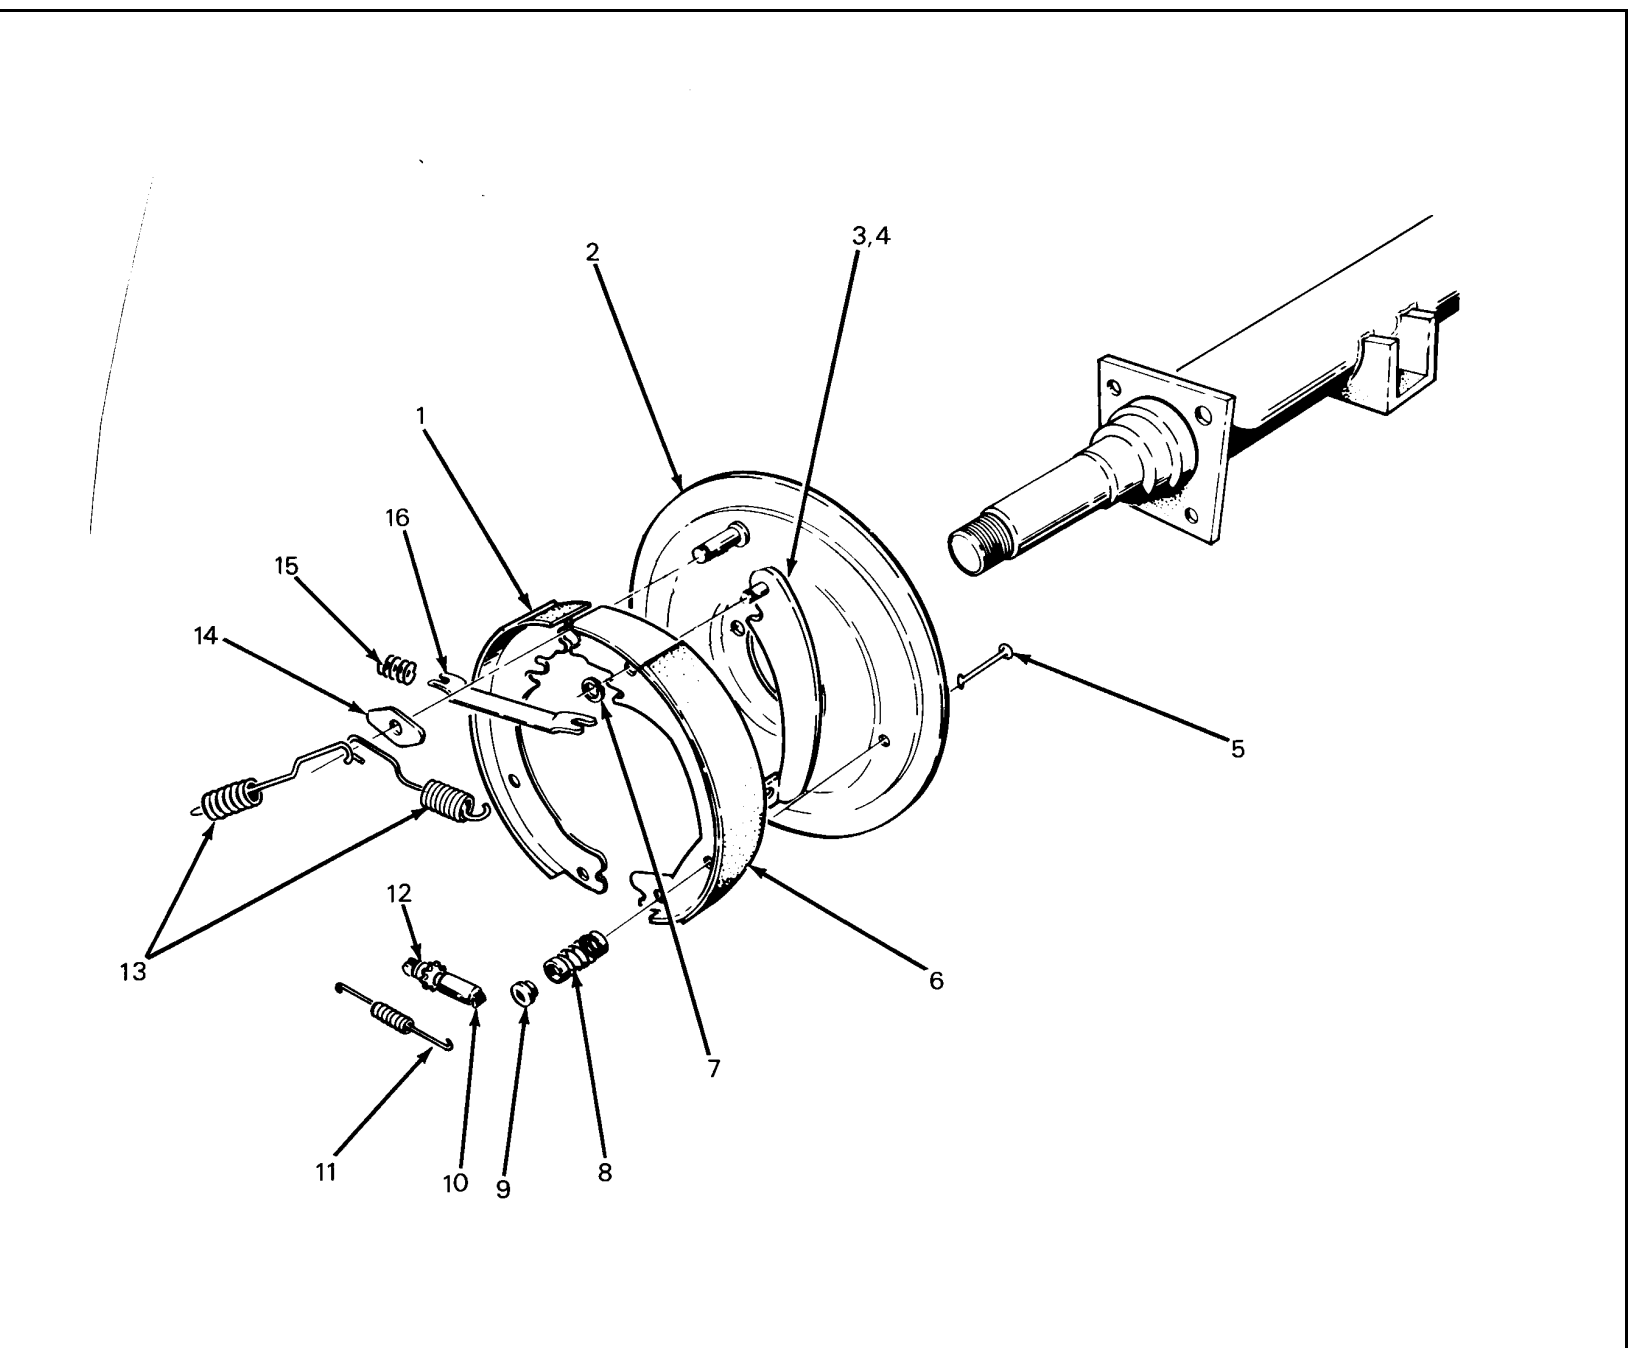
(Sheet 2 of 2) Brake Assembly
